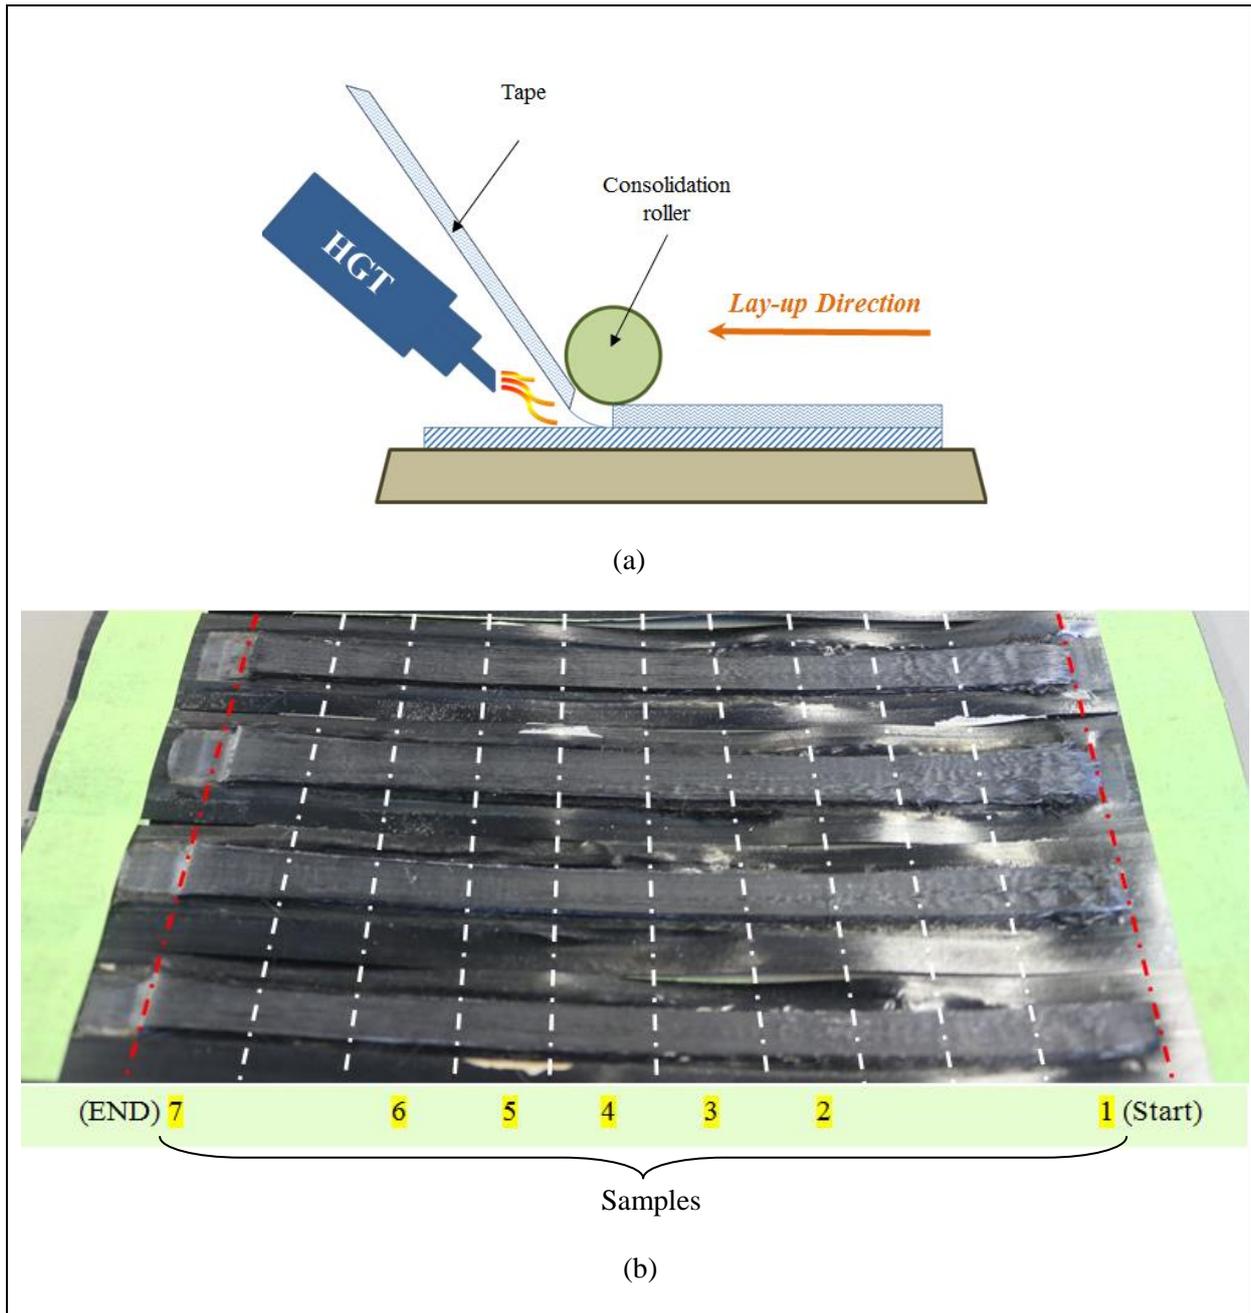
(a) AFP Lay-up process; (b) AFP manufactured laminates before cutting.
